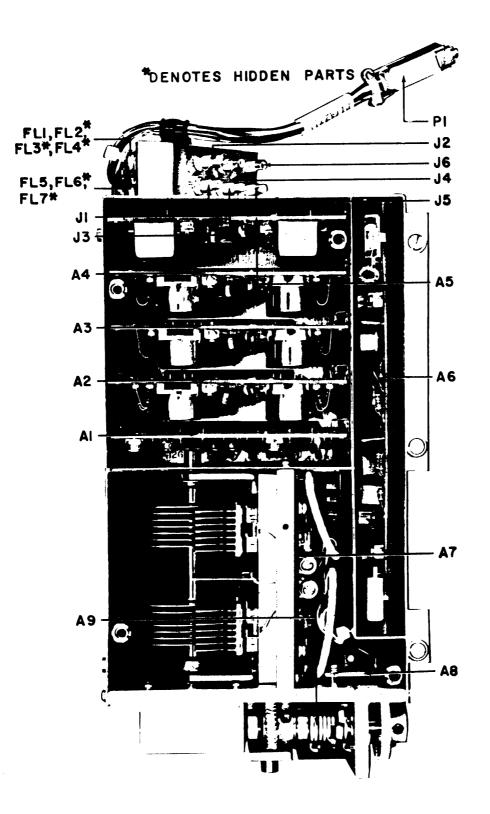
Type WJ-9120 0.5-30 MHz Tuner Assembly, Top View, Location of Components
